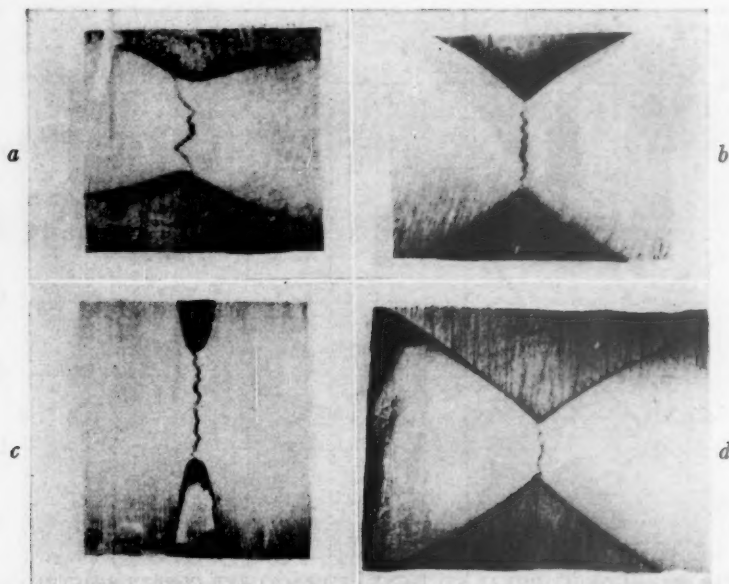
LONGITUDINAL SECTION OF FRACTURED MONEL-METAL SPECIMENS.
